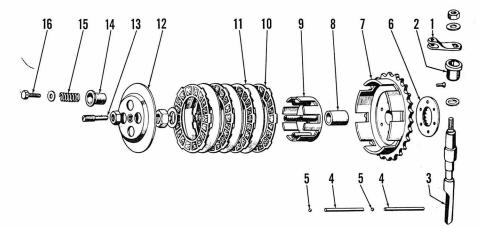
Exploded view of clutch assembly, Push rods (4) are interchangeable.
